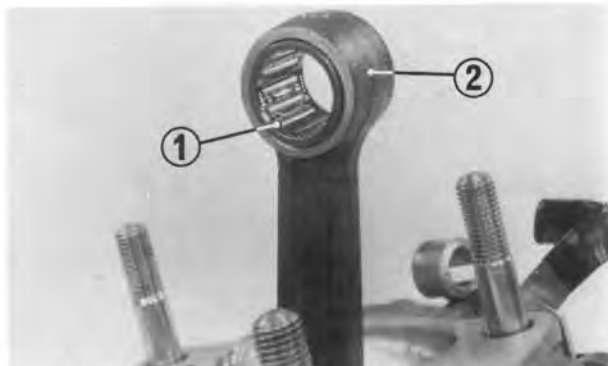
(1) Small end bearing (2) Connecting rod
